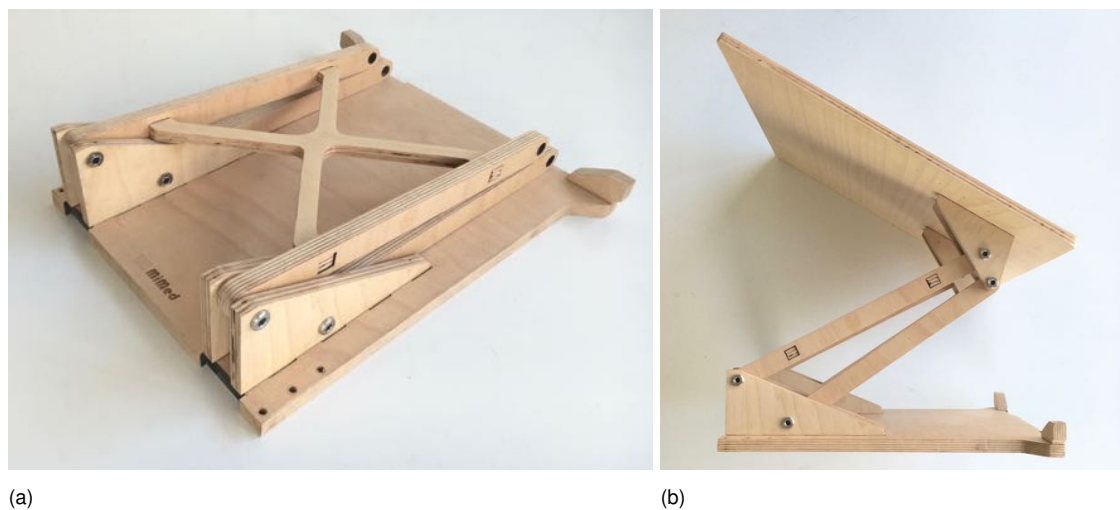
Assembly of subassembly parts with shafts and bearings of base plate and linkages (a), and subsequently seat plate with the linkages (b)
